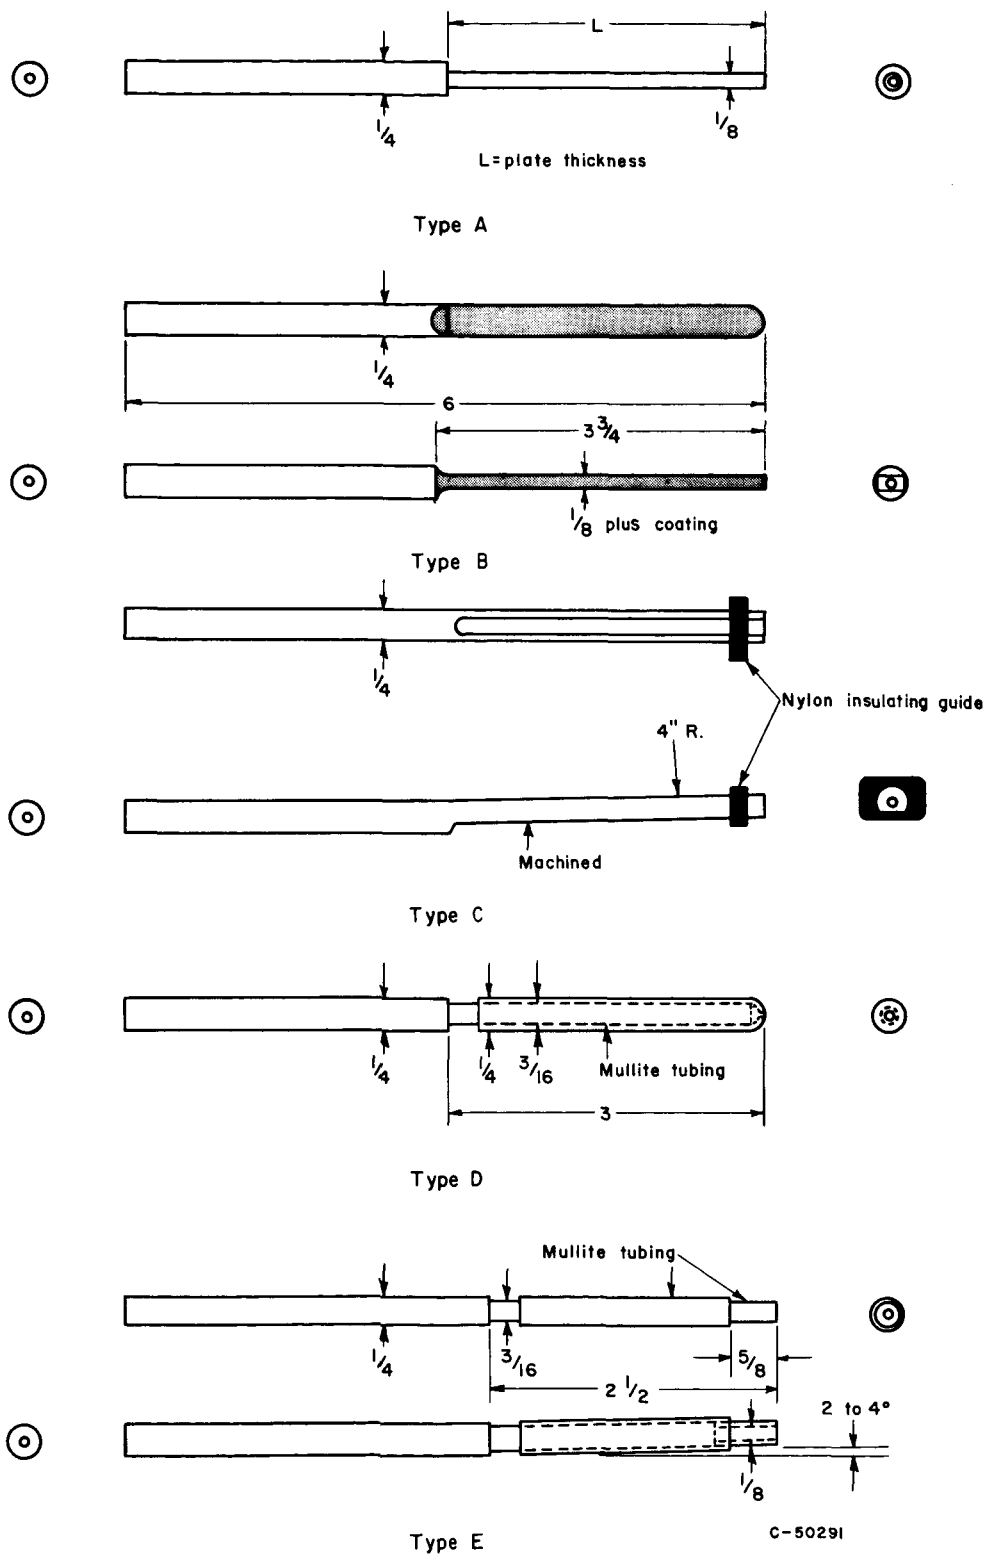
SKETCHES OF CONTACT TUBES EVALUATED FOR NARROW-GAP WELDING THICK GAGE 2219-T31 ALUMINUM
